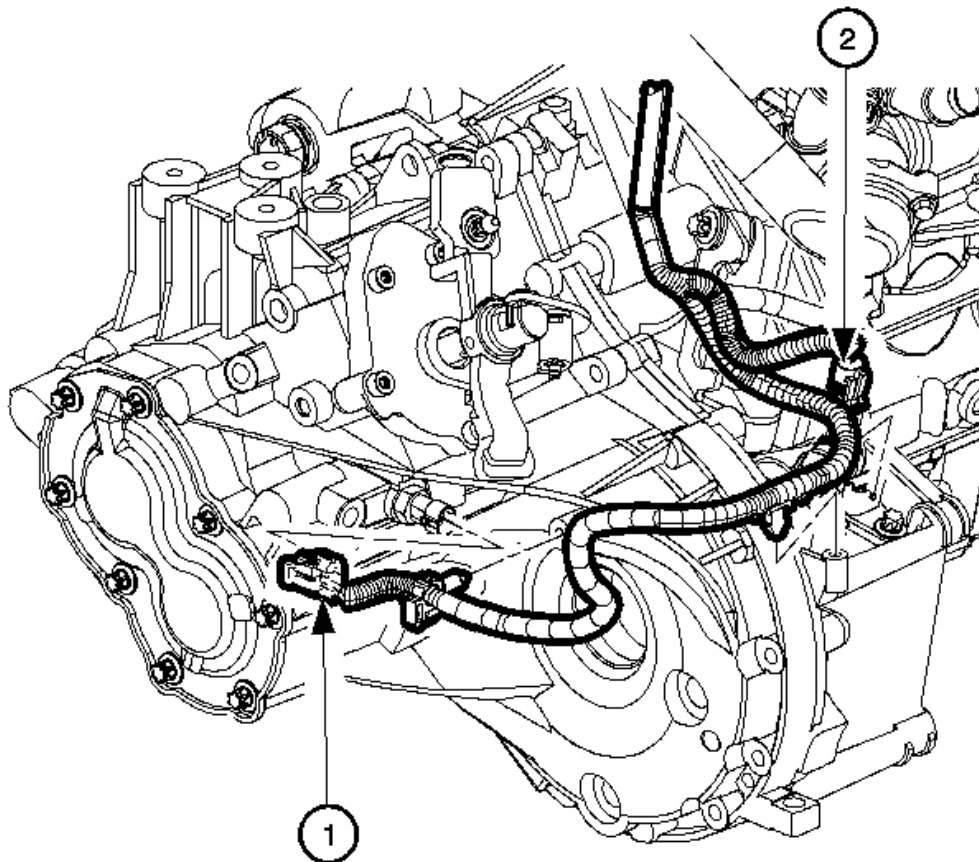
Disconnecting Back-Up Lamp Switch & Front Wheel Speed Sensor (WSS)
